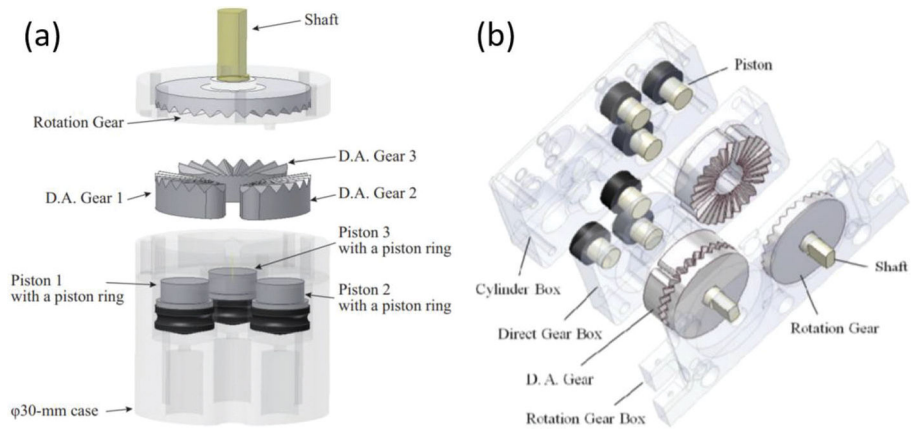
(a) $\phi 30\text{-mm}$ motor parts⁷⁰ and (b) assembly drawing of the $\phi 30\text{-mm}$ motor.⁷¹
